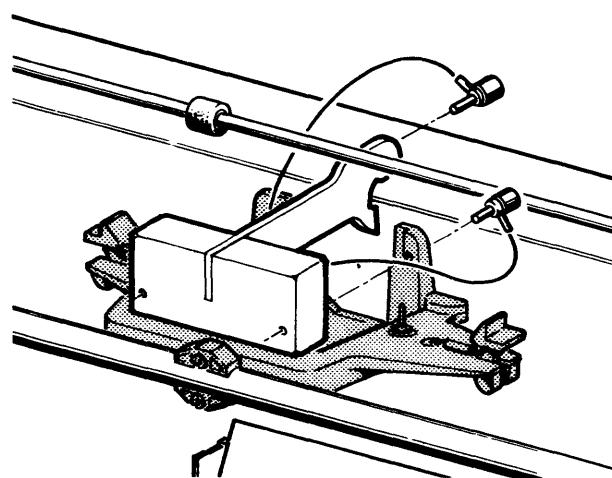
Platen-To-Print Head Adjustment Tool Installation
